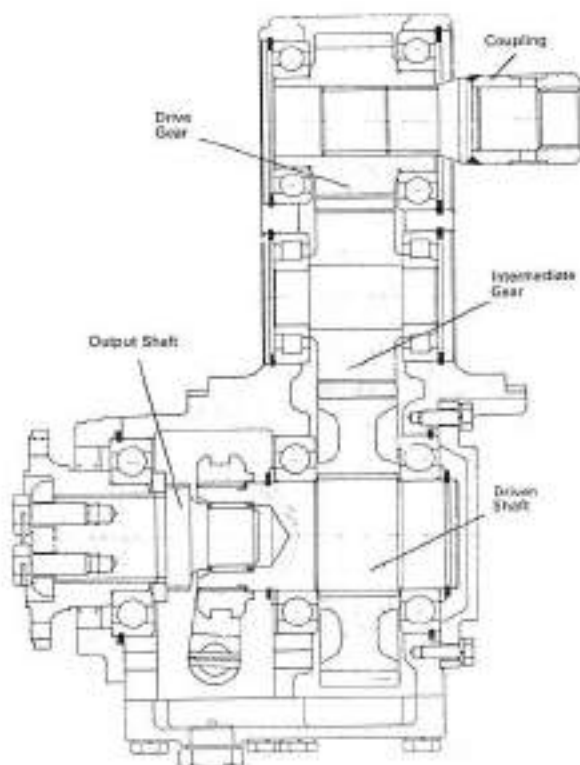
Cross-sectional view of transfer gearbox. Also see Fig. 15.
